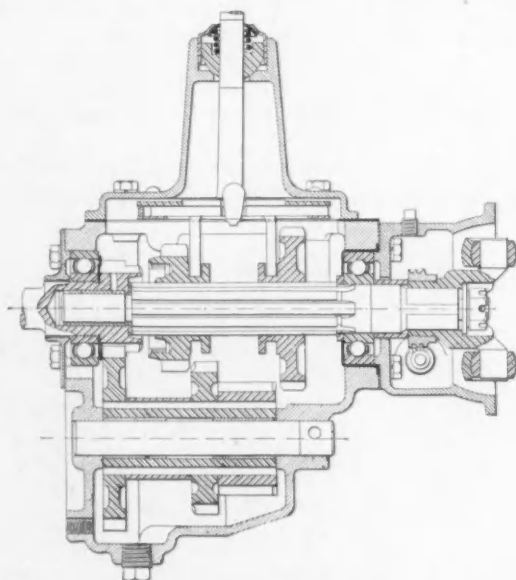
CHEVROLET THREE-SPEED GEARSET
